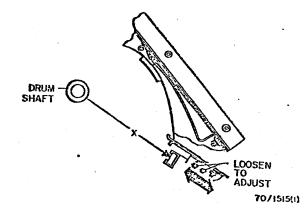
Pretransfer Corotron Mechanical Adjustment
